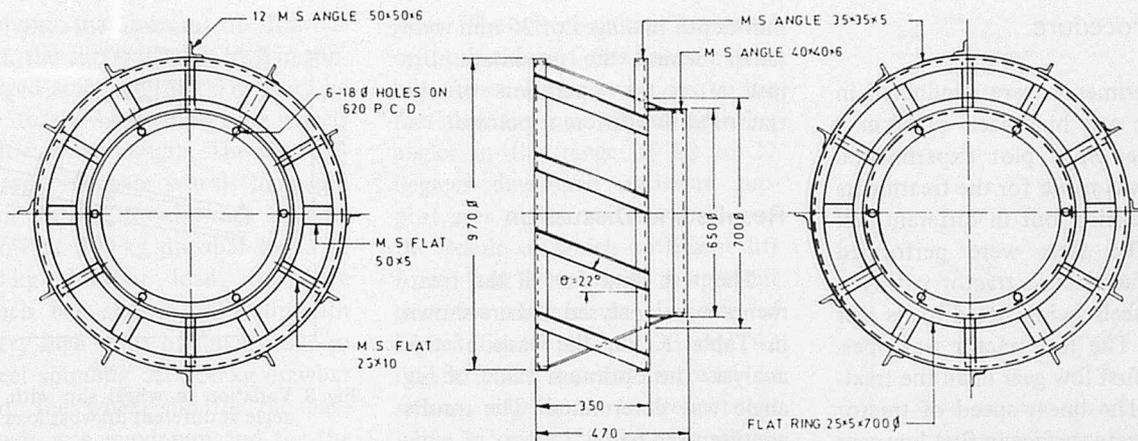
Cage wheel with 22° lug angle, unit: mm
